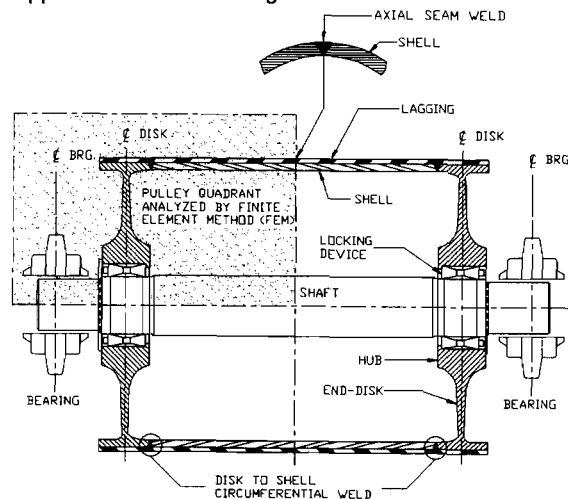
CROSS-SECTION OF PULLEY ASSEMBLY
